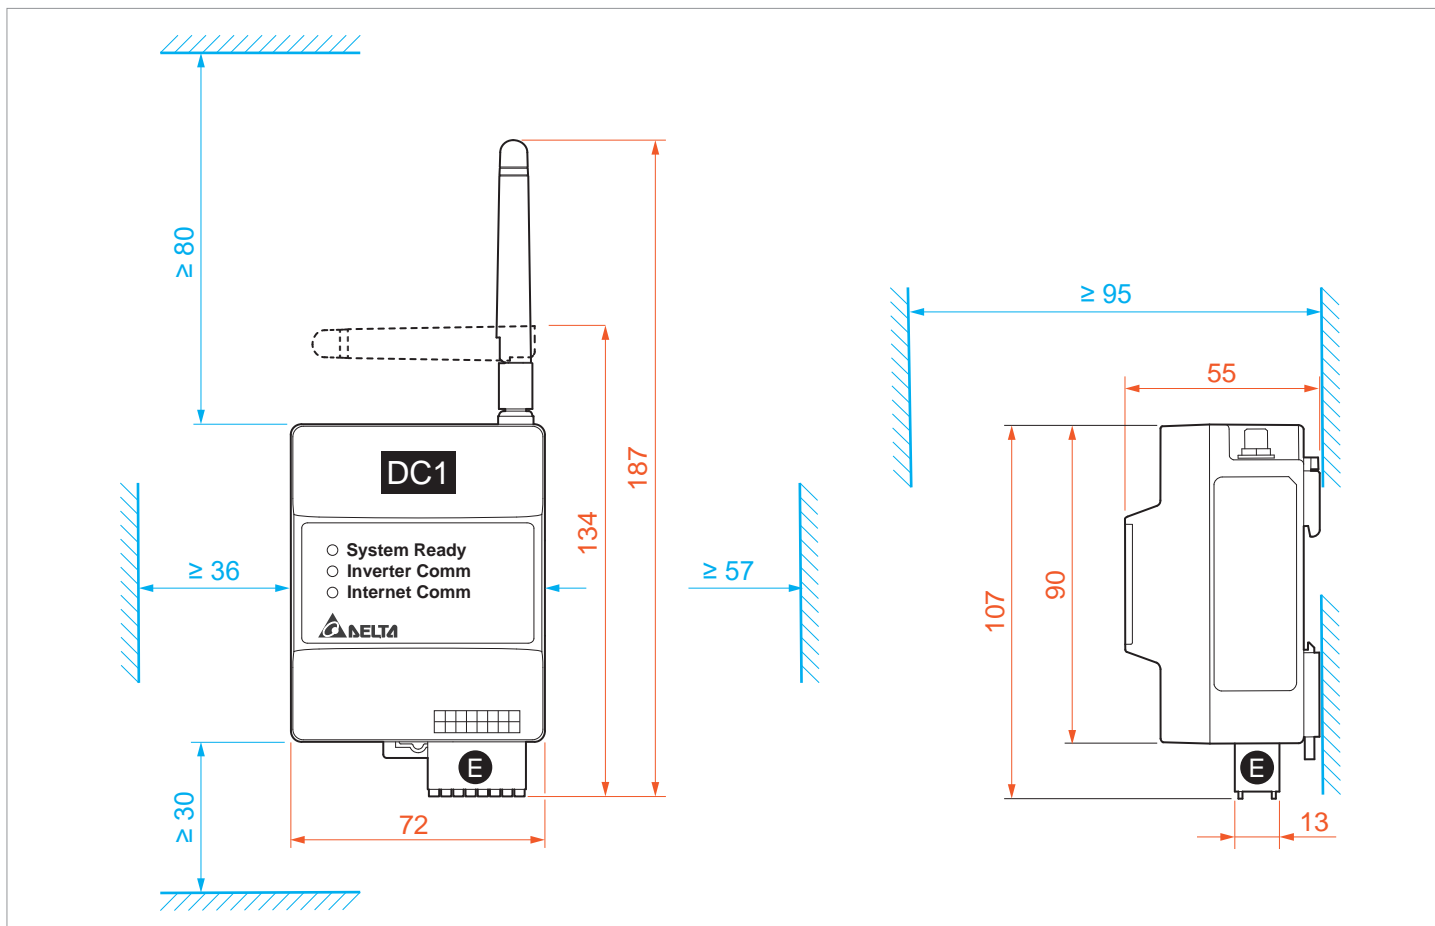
Dimensions and Mounting distances DC1 data collector (in mm)
